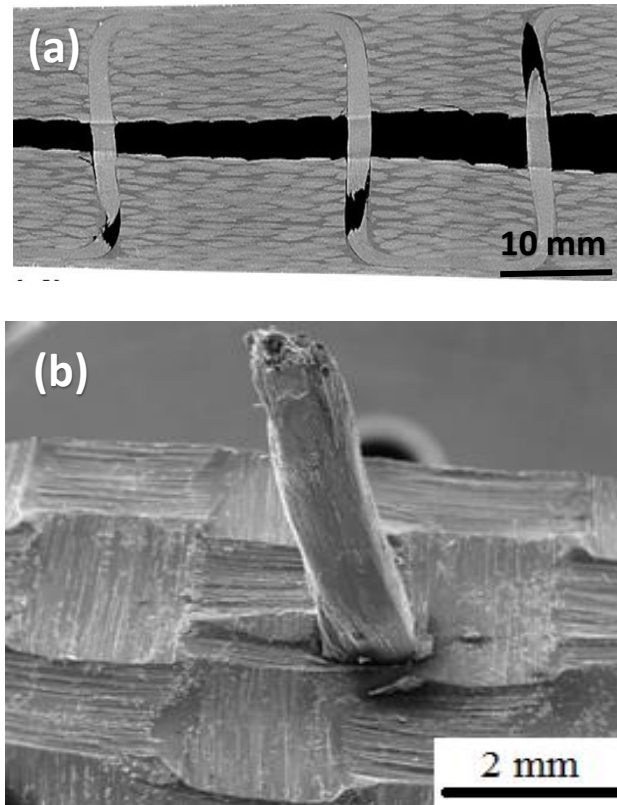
(a) X-ray computed tomography image showing side-view of DCB specimen of 3D composite containing carbon z-binders when subjected to mode I interlaminar cyclic loading. The direction of crack growth is from right to left. (b) Fracture surface of 3D composite reinforced with carbon z-binders.
